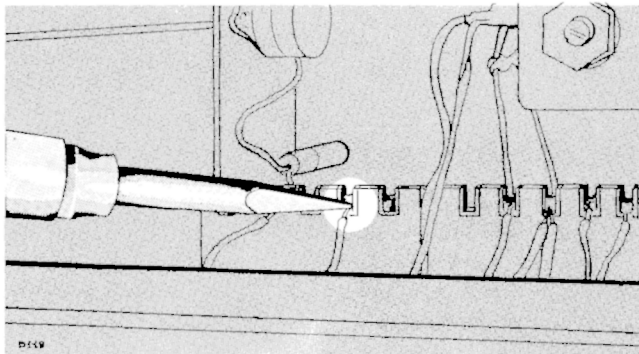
Correct method of applying heat in soldering to a ceramic strip.
